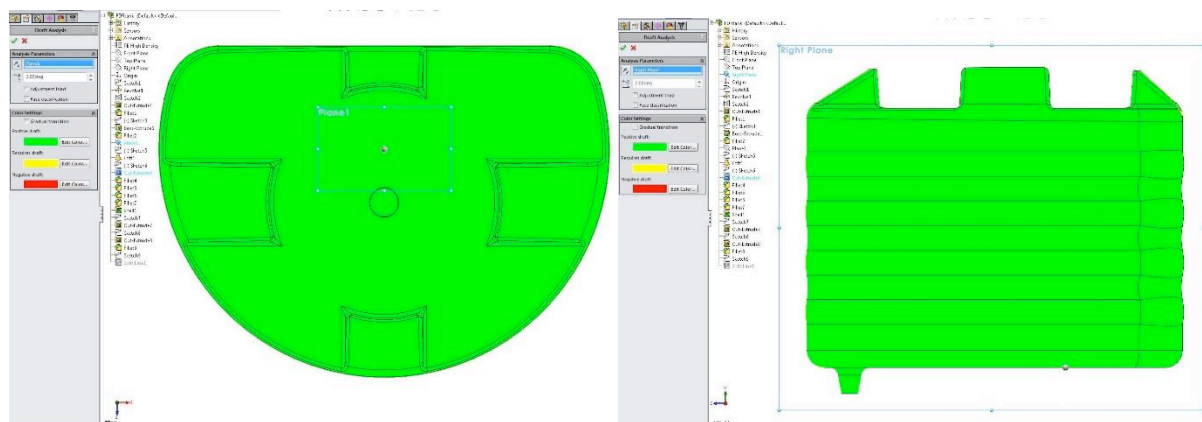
The reservoir tank can be molded in a 3-part mold. Draft analysis shows the tank has an appropriate draft angle for molding.
